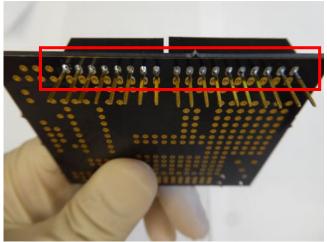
Bottom view of a finished solder work. Note all the solder connections (red box).
